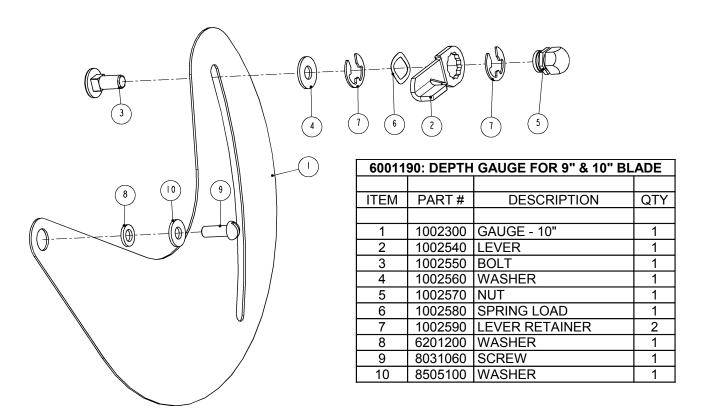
DEPTH GAUGE FOR 9" & 10" BLADE
